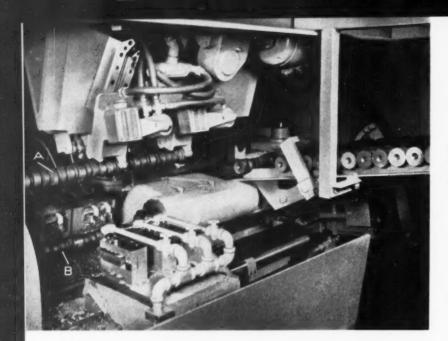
The transfer carrier in position above the machine centers, a rough camshaft being held by the loader arm while the unloader arm is ready to descend and pick up the semi-finished camshaft
